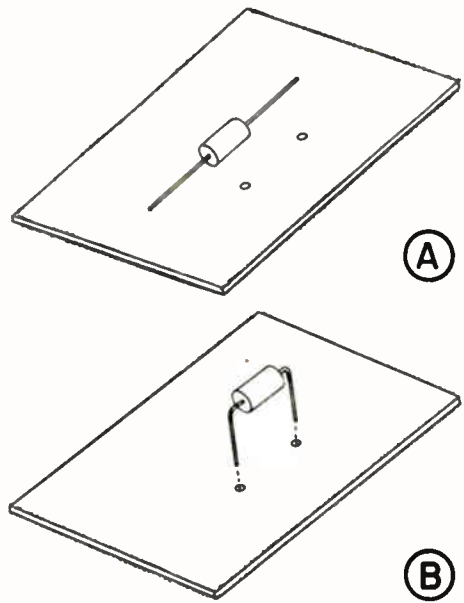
(A) Measuring the resistor against the mounting holes; (B) resistor leads bent to correct spacing.
